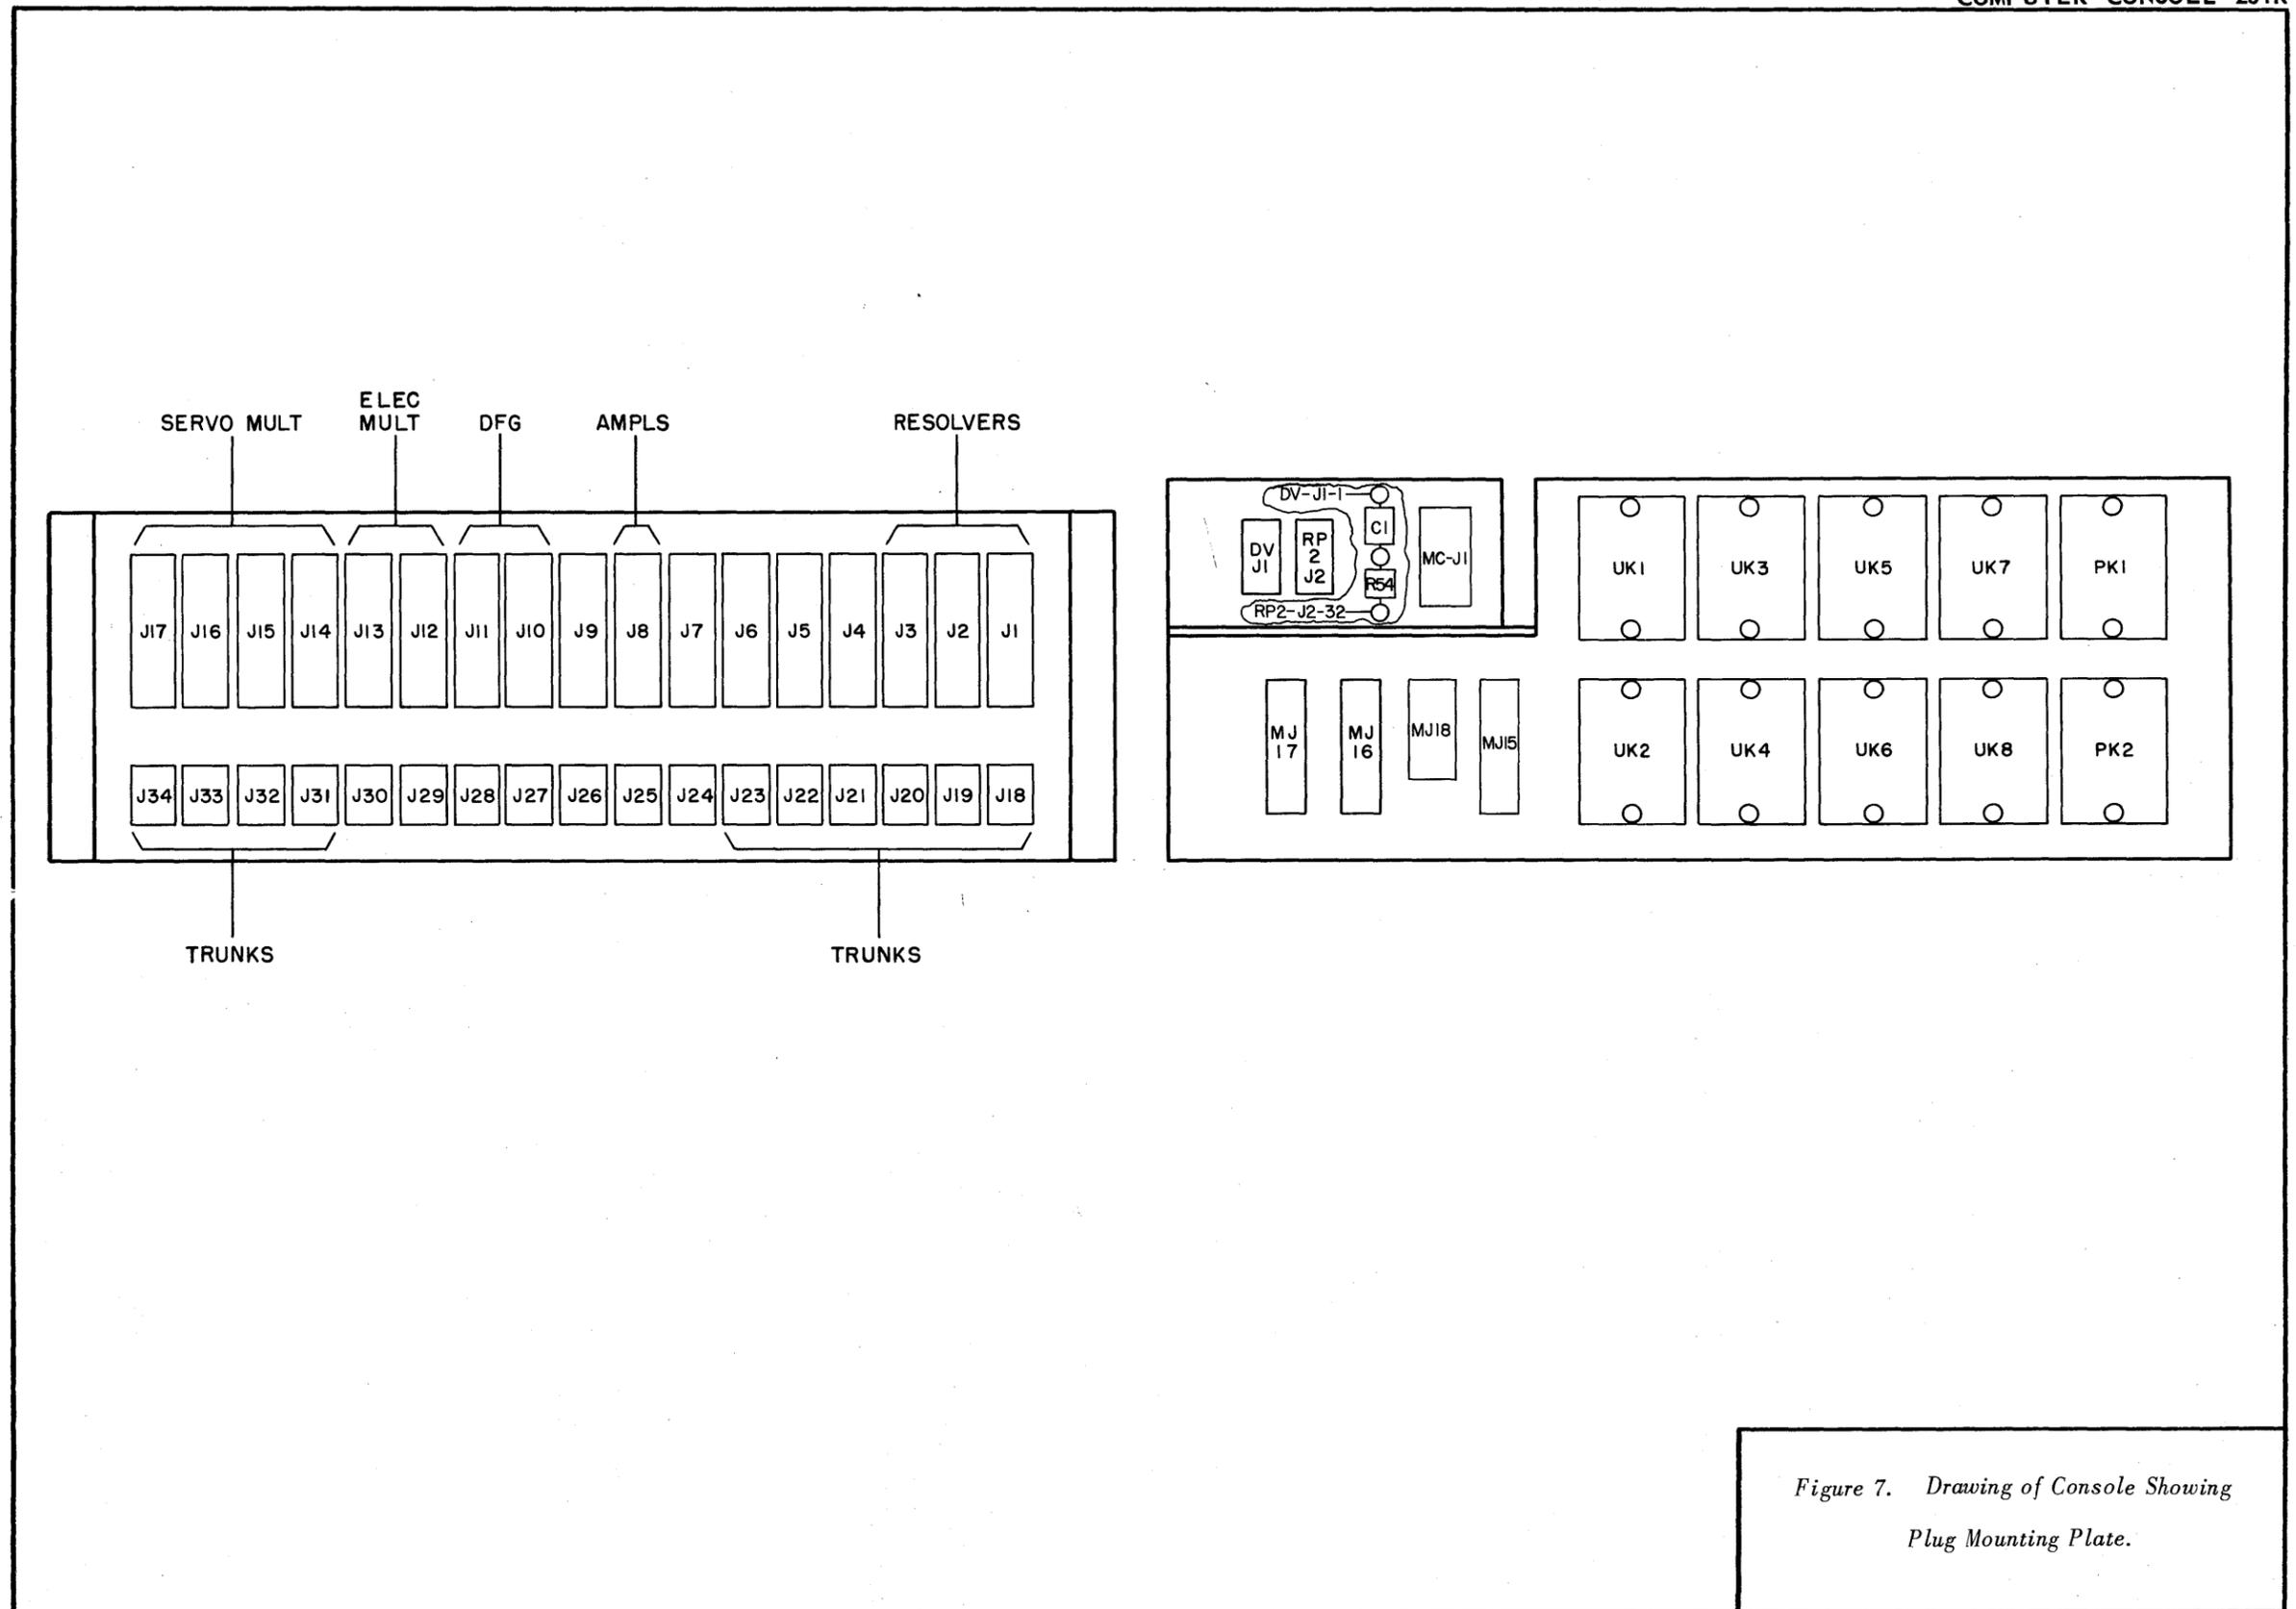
Drawing of Console Showing Plug Mounting Plate.
